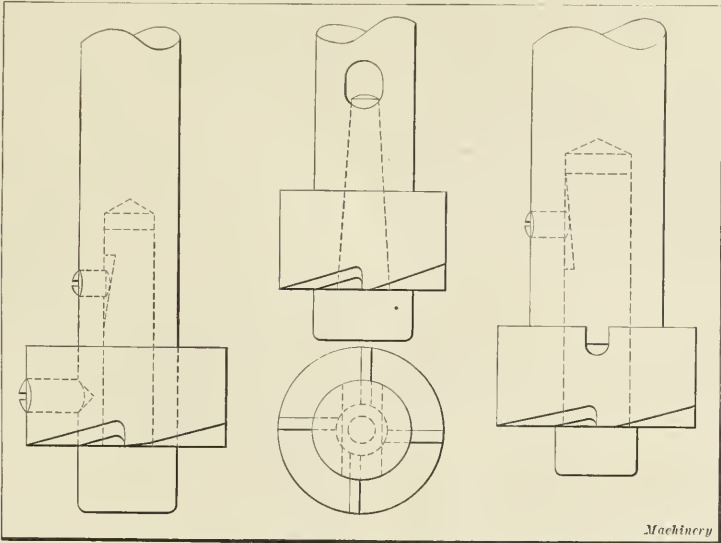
Spot-facing Tool with Interchangeable Cutter
